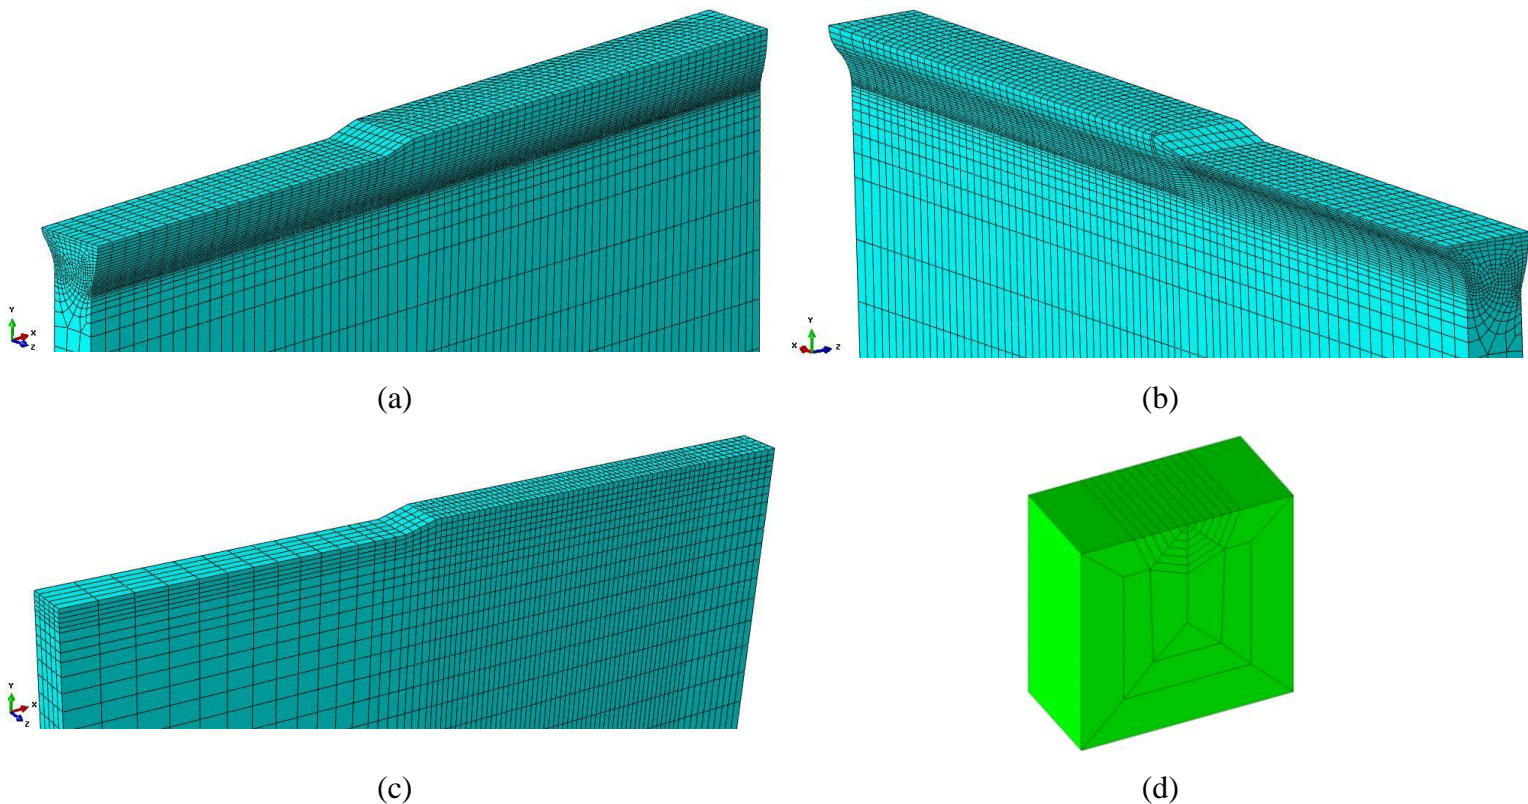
Mesh pattern used for (a) CTS geometry with weld reinforcement, front view (b) CTS geometry with weld reinforcement, back view (c) CTS geometry without weld reinforcement (d) crack block.
